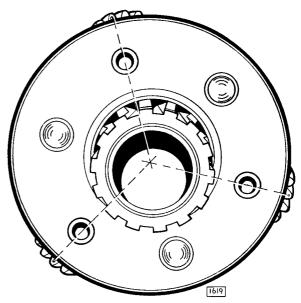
Assembly of the planet gears—note the positions of the marked teeth.
